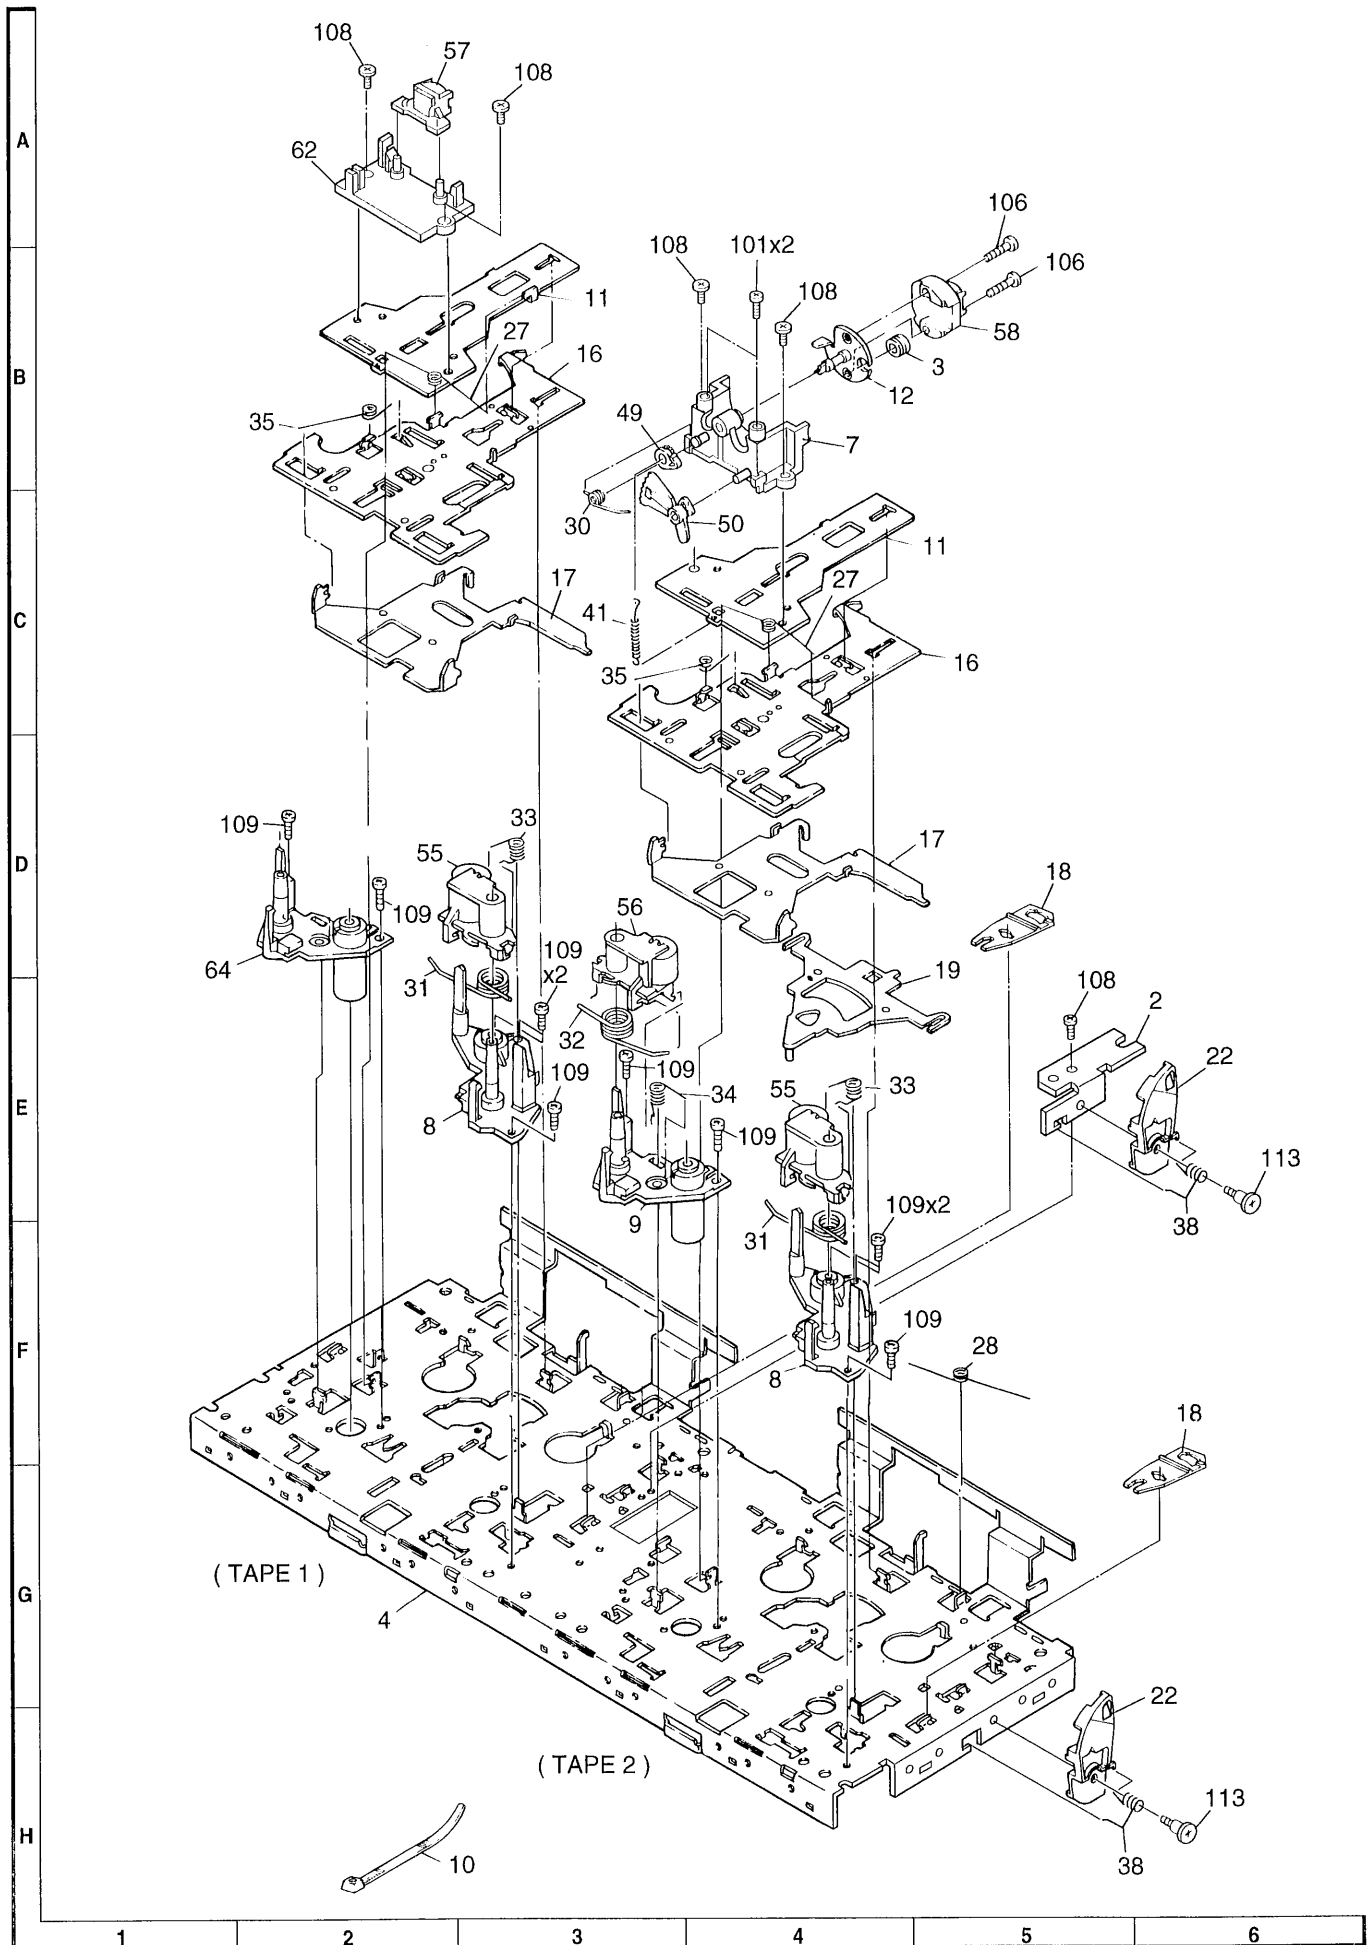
TAPE MECHANISM EXPLODED VIEW (1/2)
